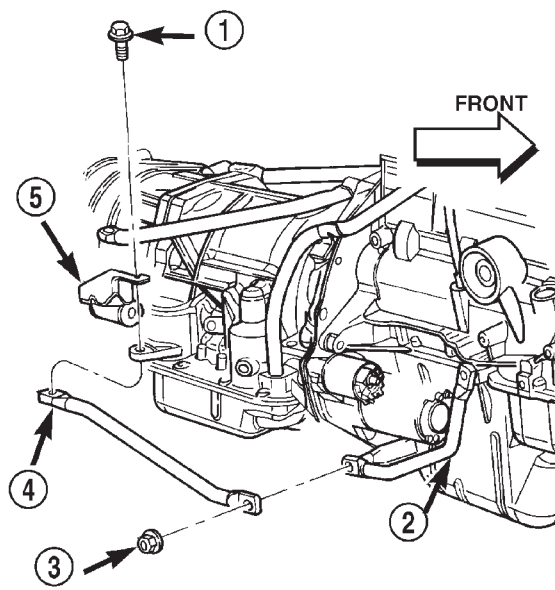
Transmission Bending Braces and Exhaust Hanger
